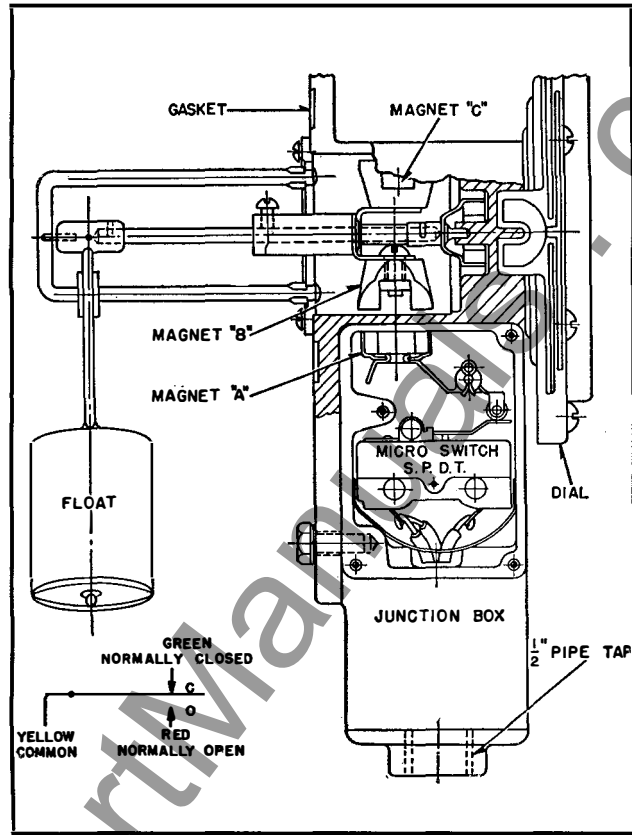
Magnetic Type Liquid Level Indicator Showing Alarm Contacts.
